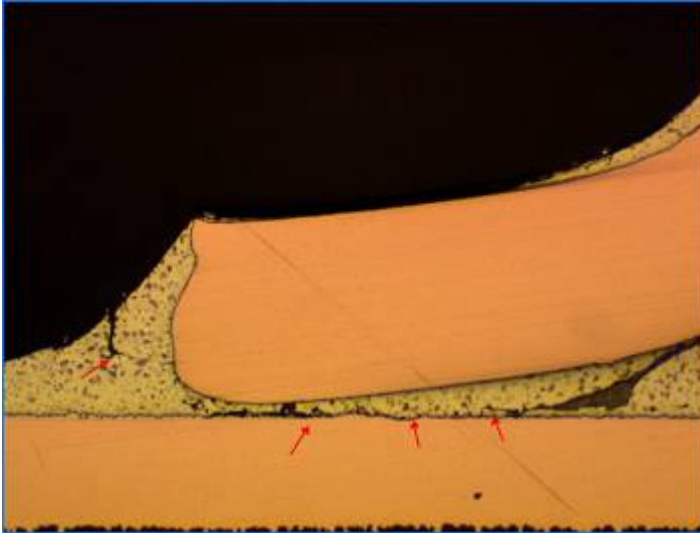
cross section, SN62, U31, left lead solder crack, 200x, b
